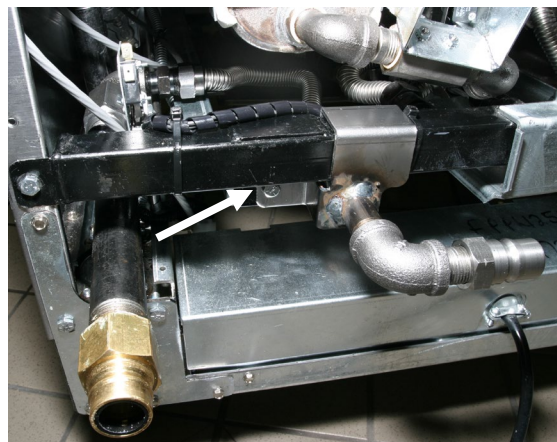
The assembly is shown in place. The quick disconnect is secured with the existing mounting bolt on the rear return manifold (see arrow).
